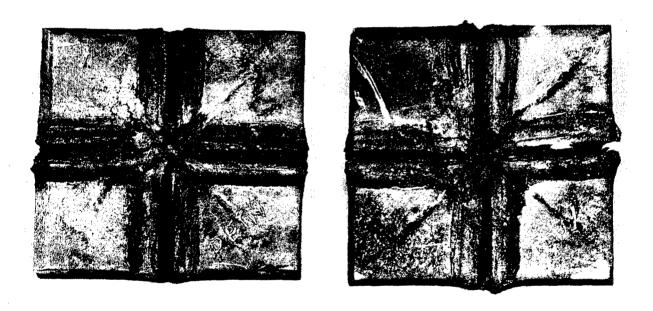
TYPICAL ARRANGEMENT AND STAINLESS STEEL PLATES SCORED BY SHAPED MILD DETONATING FUSE
